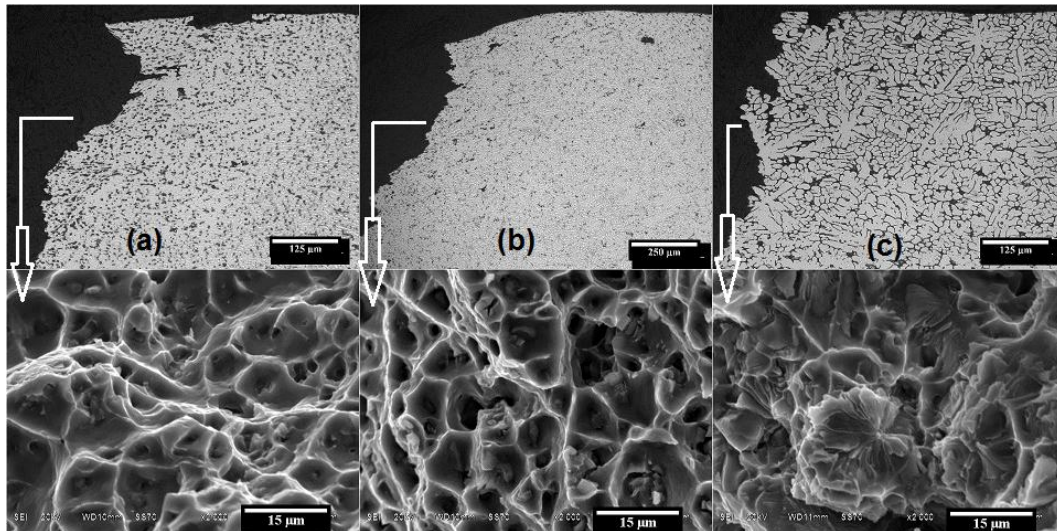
Tensile fracture surfaces of 5083-H111 welds displaying predominantly ductile failure in the weld metal of (a) 5083/ER5356, and (b) 5083/ER5183 welds; and mixed-mode failure along the interdendritic eutectic regions in (c) 5083/ER4043 weld metal.
